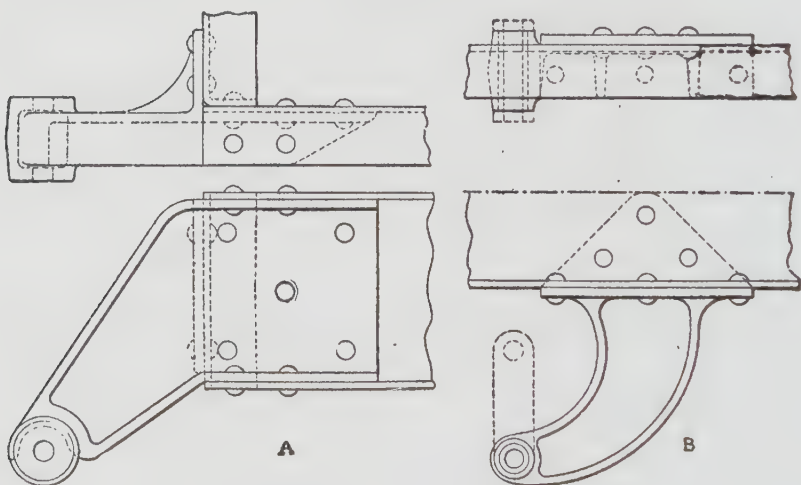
MOTOR TRUCK SPRING BRACKETS.
